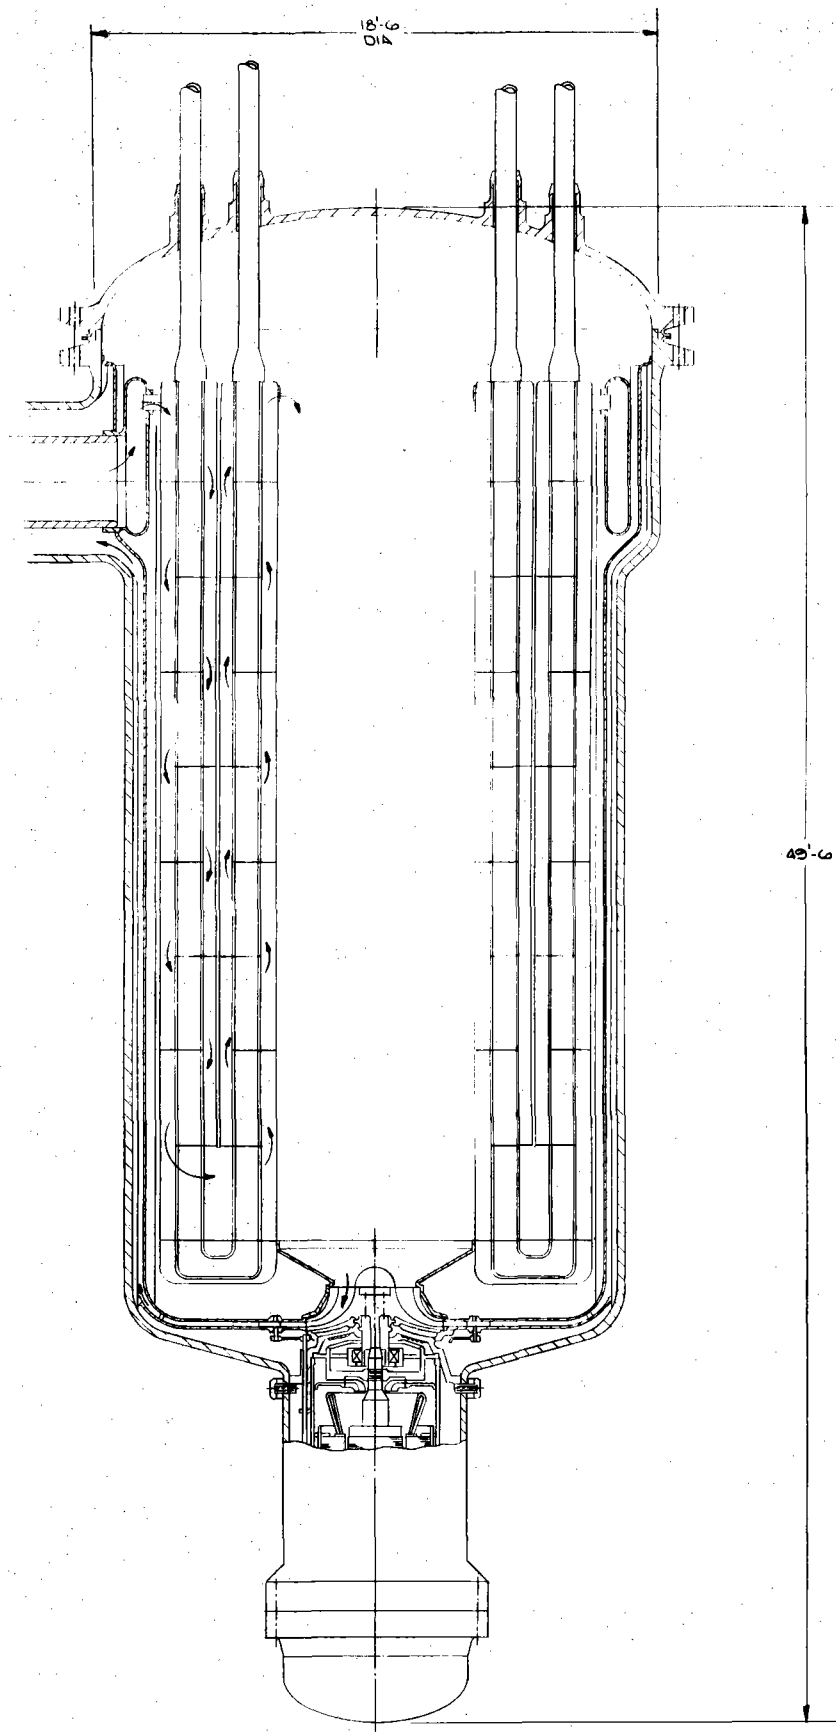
Buried Circulator Design Variation of U-tube IHX Assembly.
